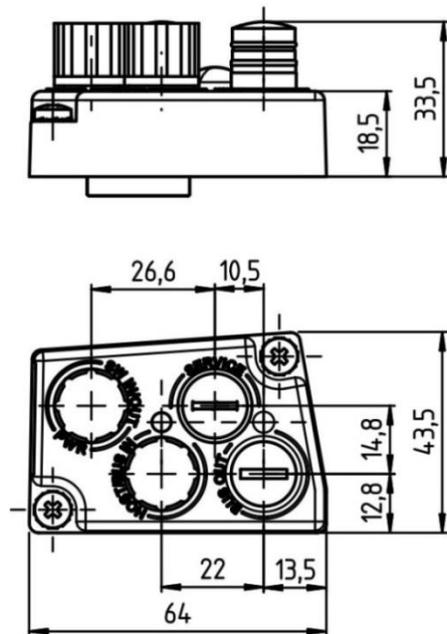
Dimension drawing BE 901 MS SSI connection hood (all dimensions in mm)
